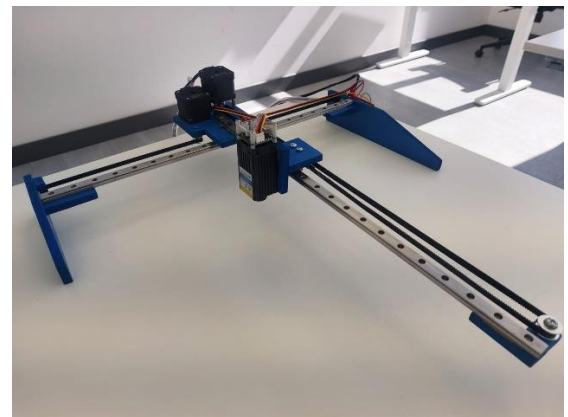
Complete assembly of the CNC laser-cutting machine.
